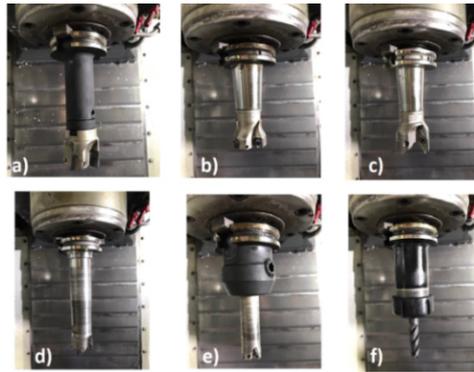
Used tools: (a) Milling head, (b) Face cutter, (c) Plunge-cutting $\Phi 42$, (d) Plunge-cutting $\Phi 32$, (e) High feed milling cutter, (f) Monolith cutter
